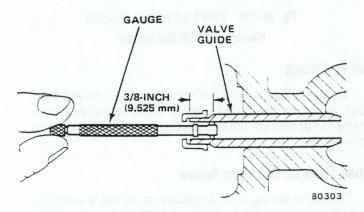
B-107 Measuring Valve Guide Bore with Telescoping Gauge
